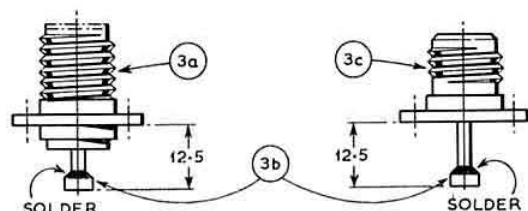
Versions A and B of the coaxial sockets (3), with contact rivet fitted.
